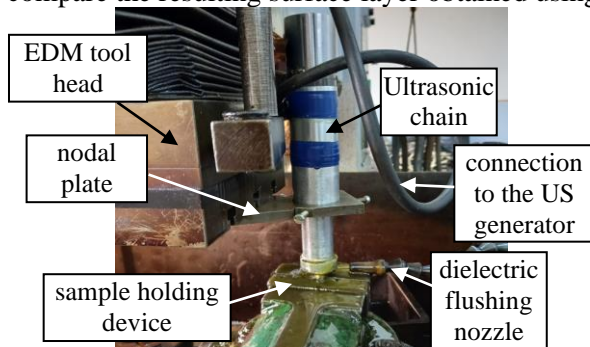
The tool head of the ELER 01 machine and the US chain mounted on it
